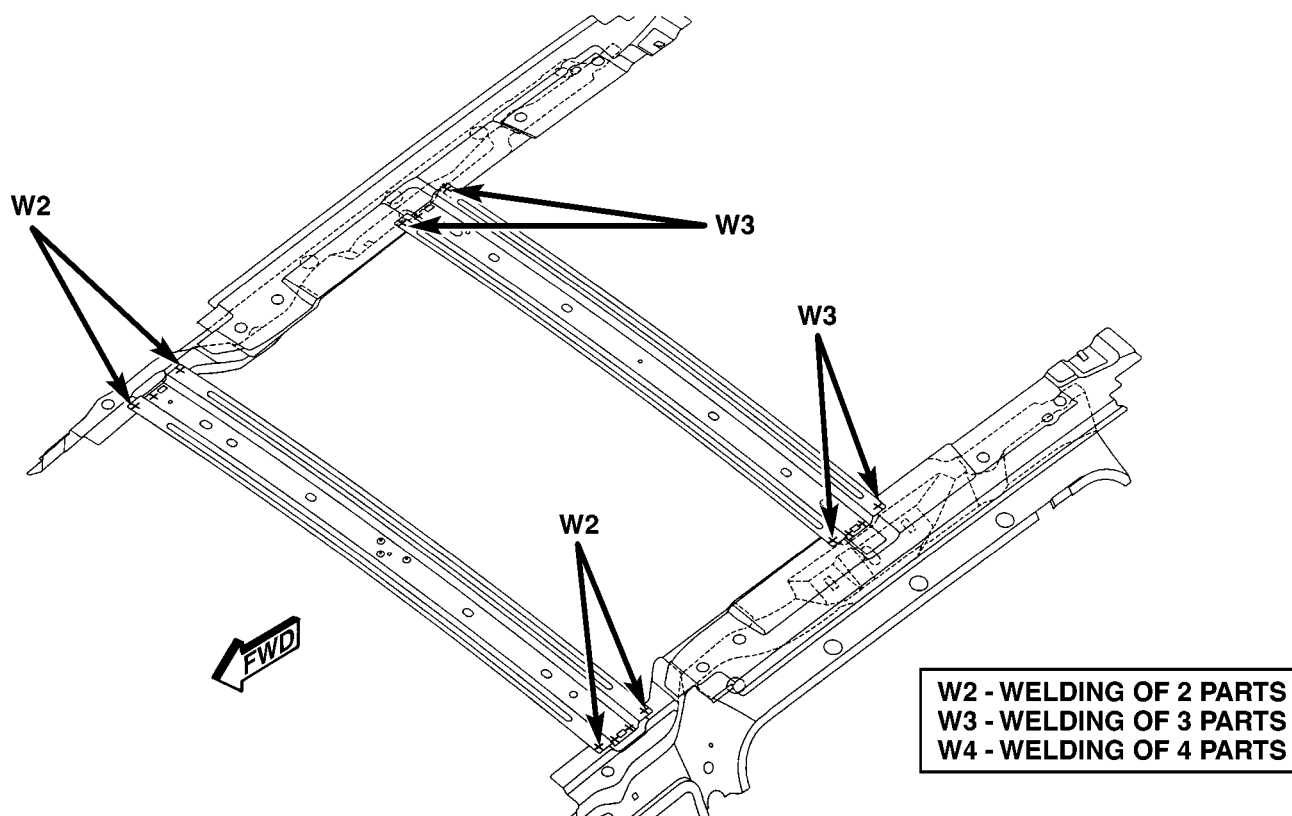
ROOF BOWS/INNER ROOF SIDE RAILS
